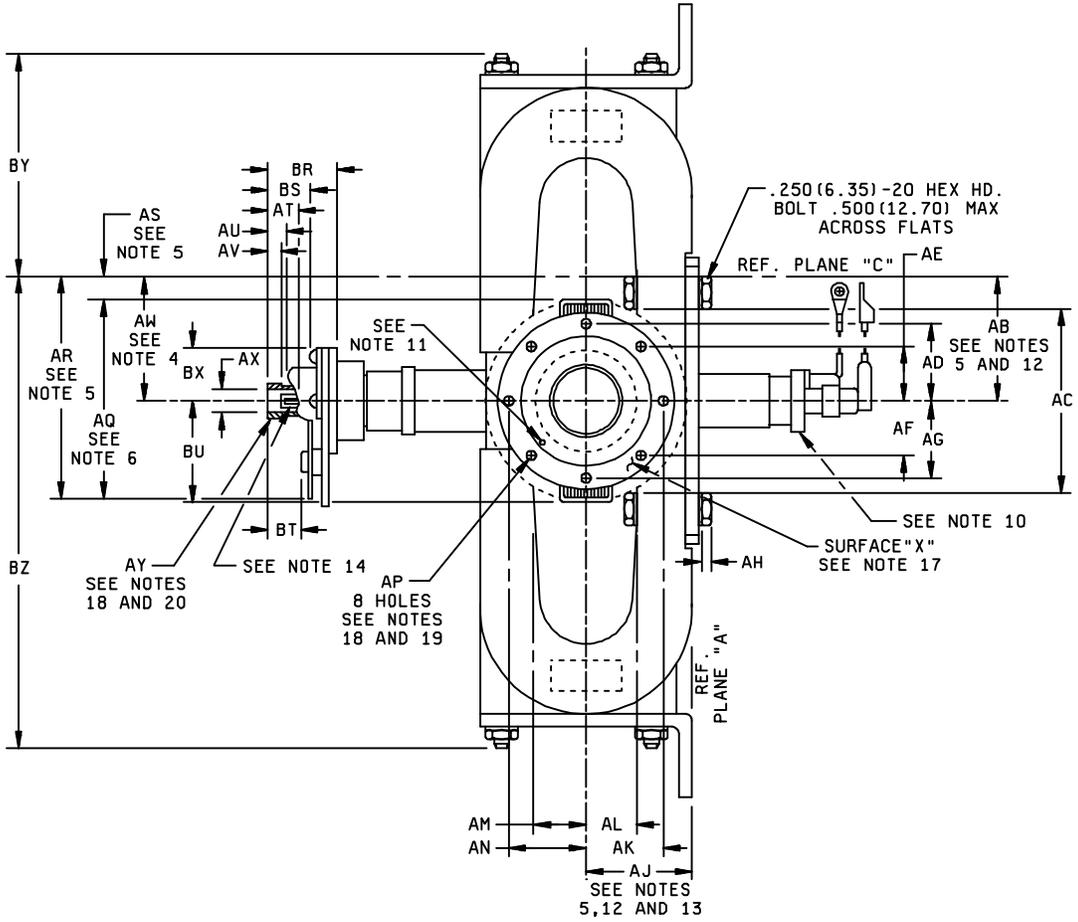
Outline drawing of electron tube type 7156A - Continued.
